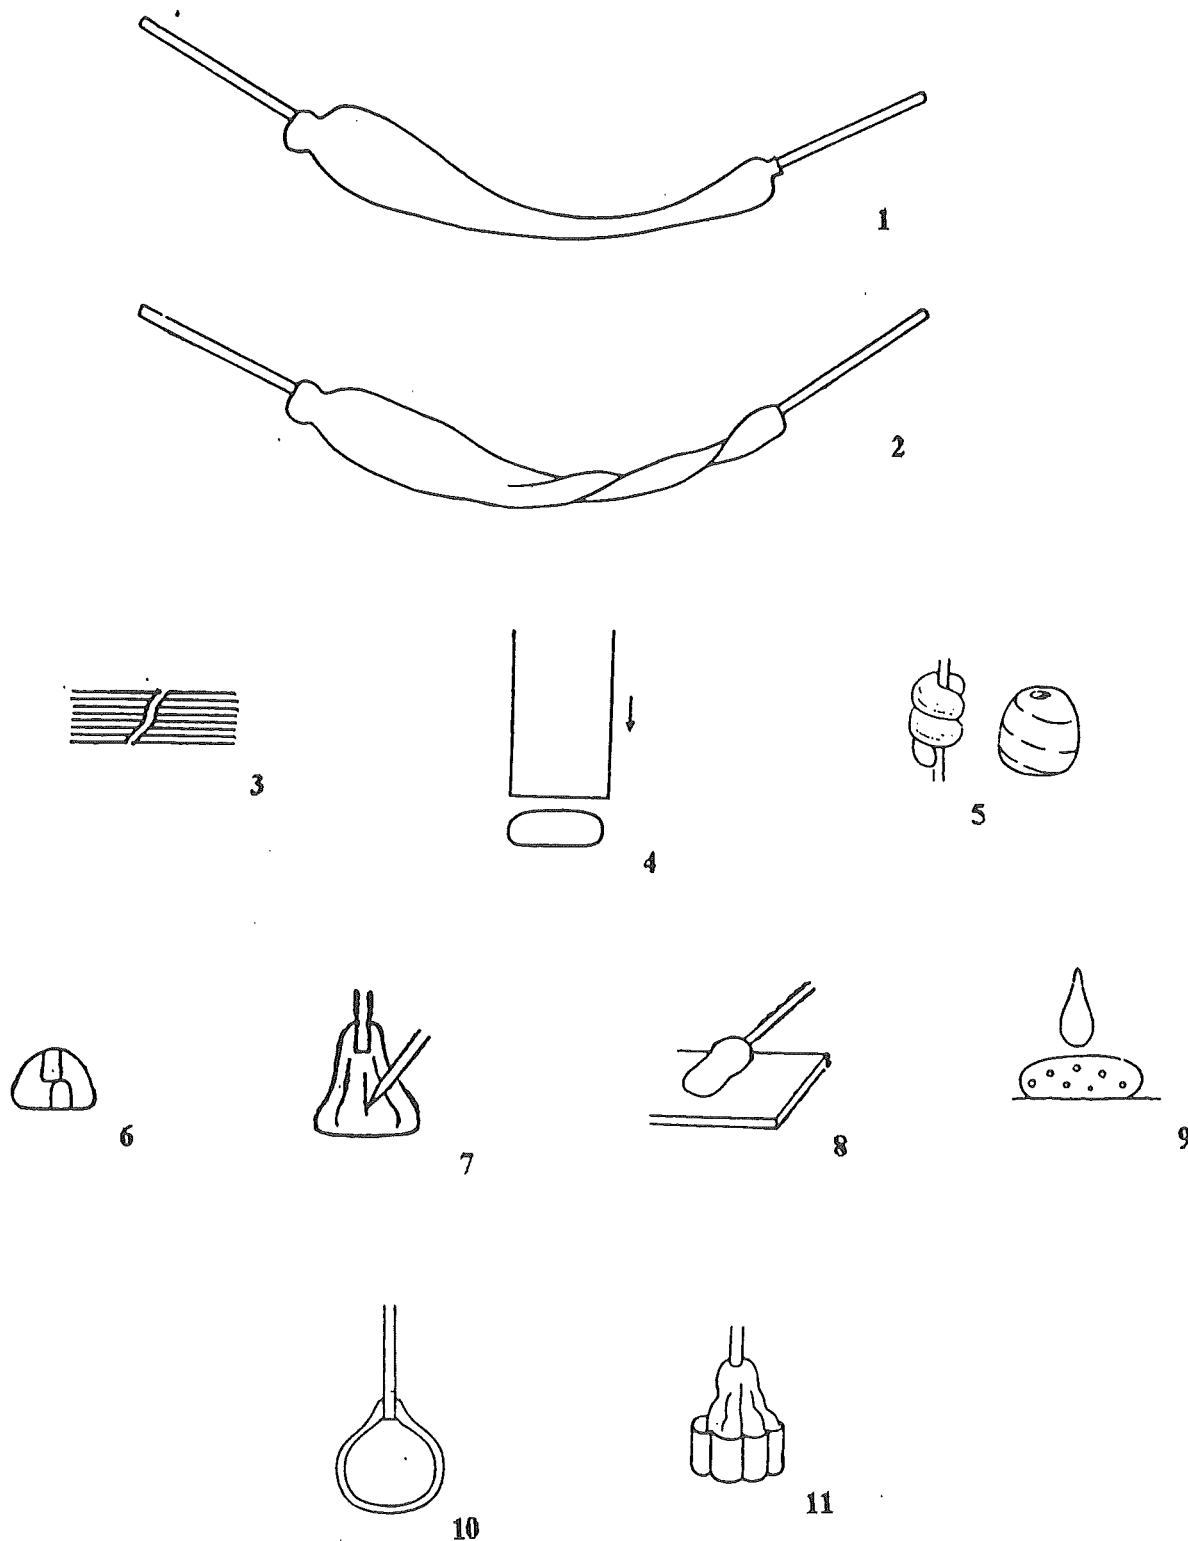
Production techniques for making Old Russian glass goods in Moscow in the 12th-14th centuries: 1. drawing; 2. spinning; 3. welding; 4. pressing against a flat surface; 5. winding; 6. two-side boring; 7. making channels with a point; 8. rolling; 9. casting on the surface; 10. free blowing; 11. mould blowing.
